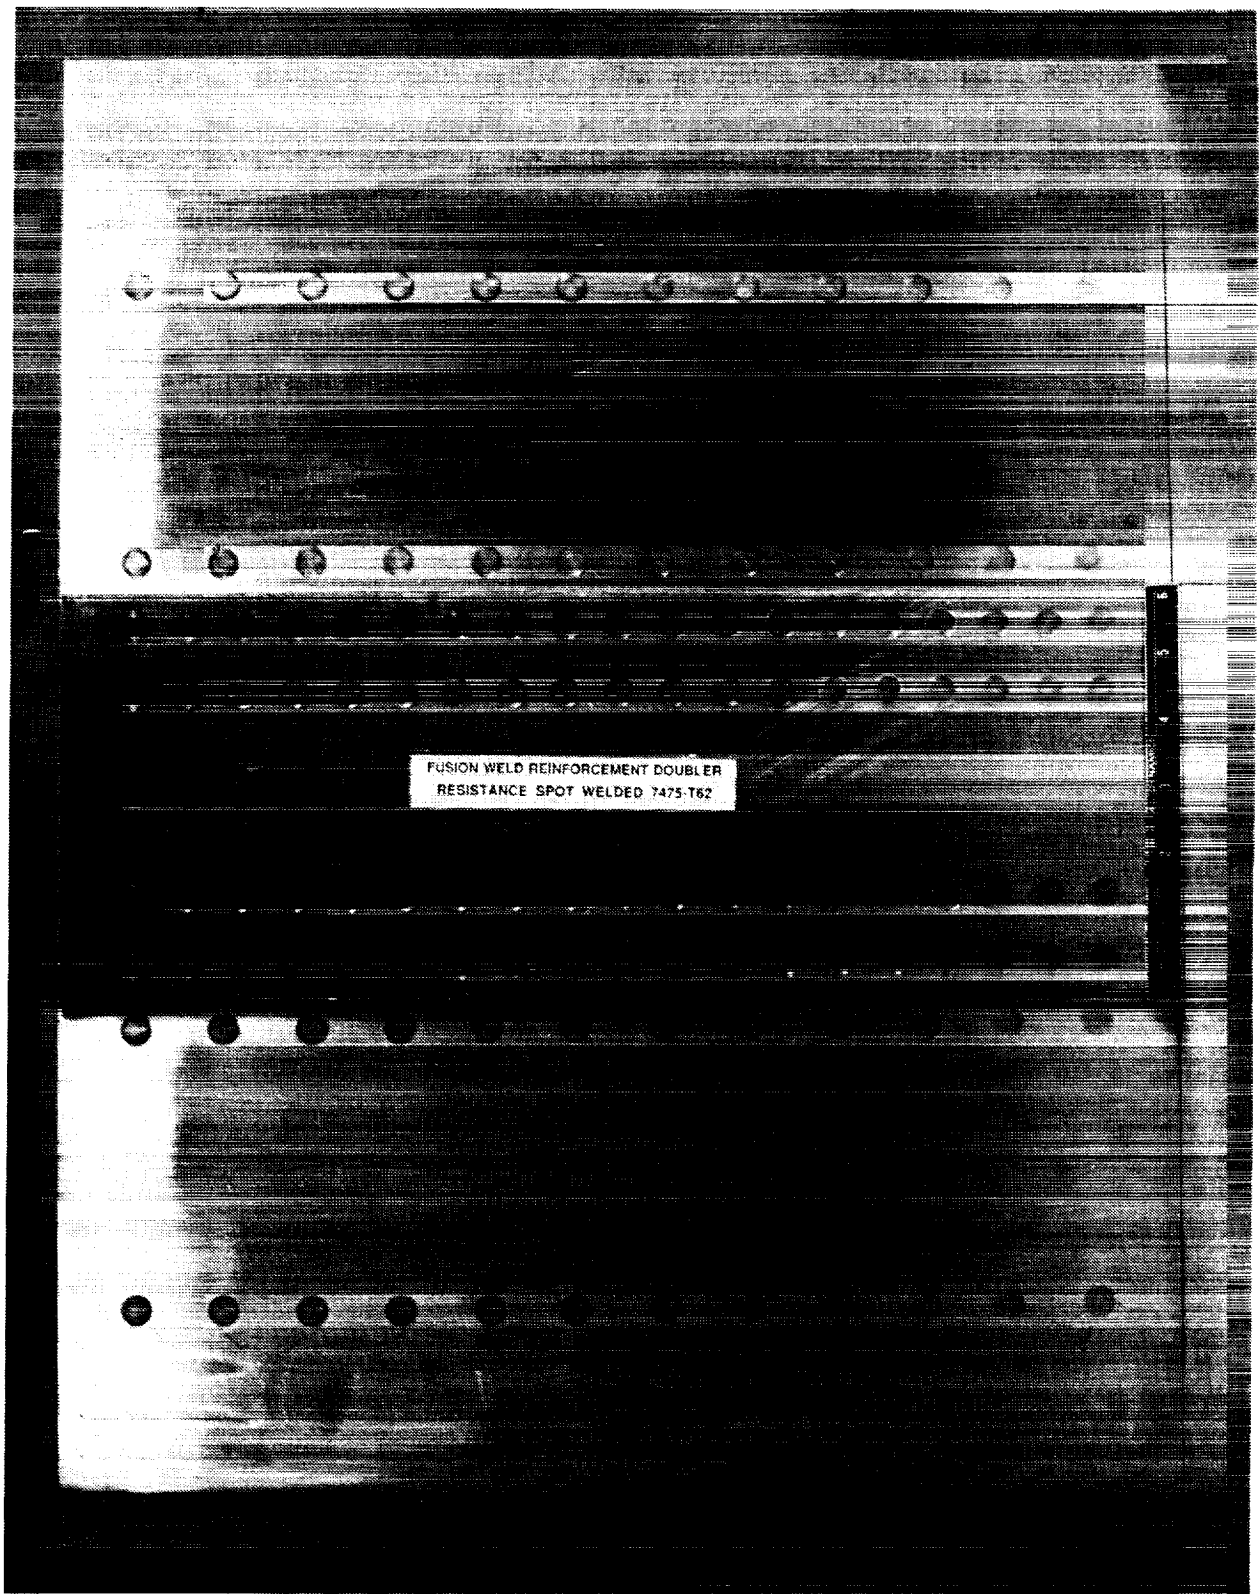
Back View of Doubler Reinforced Fusion weld.
